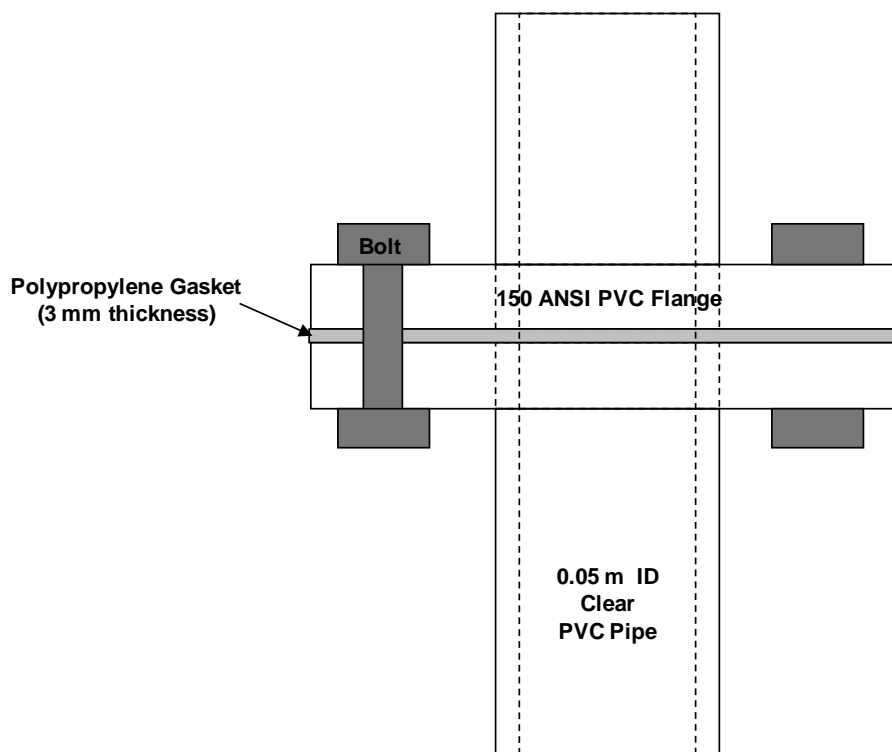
Schematic diagram of the flanges used to connect the test section strings in TowerLAB.
